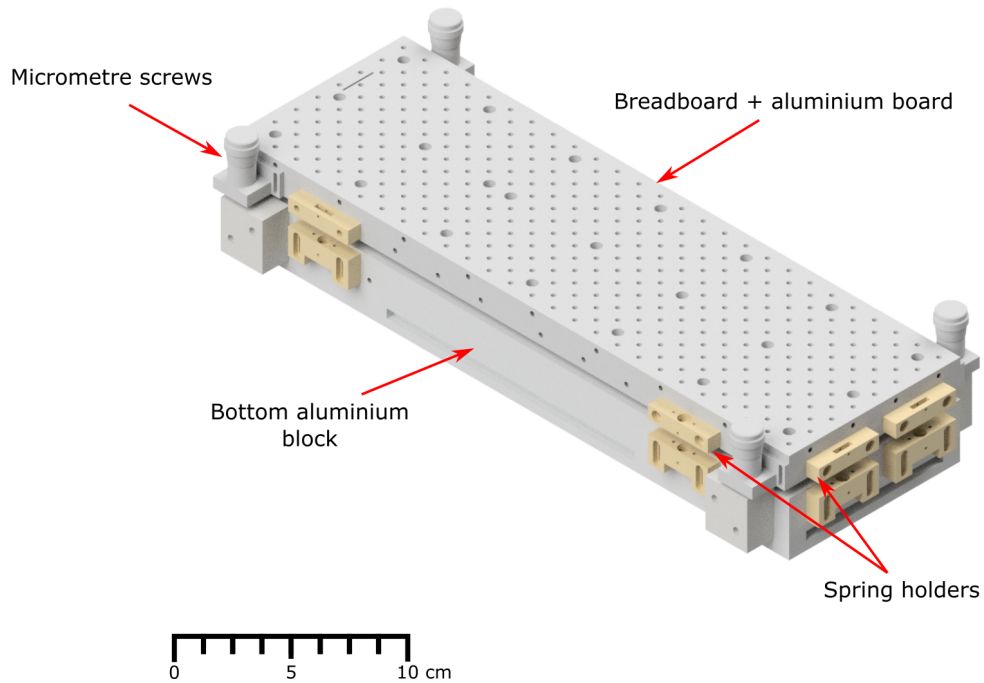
3D CAD drawing of the microscope board without optics.
